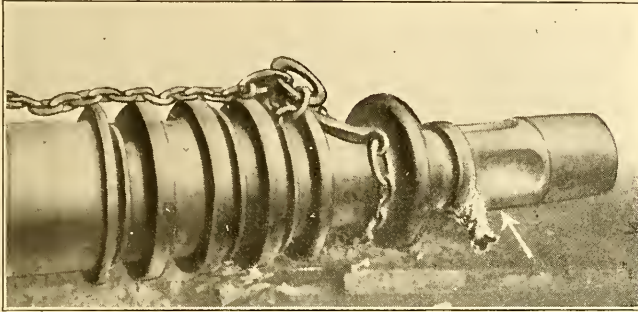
Roll Neck Welded to Large Steel Roll with Pods Cast in.
